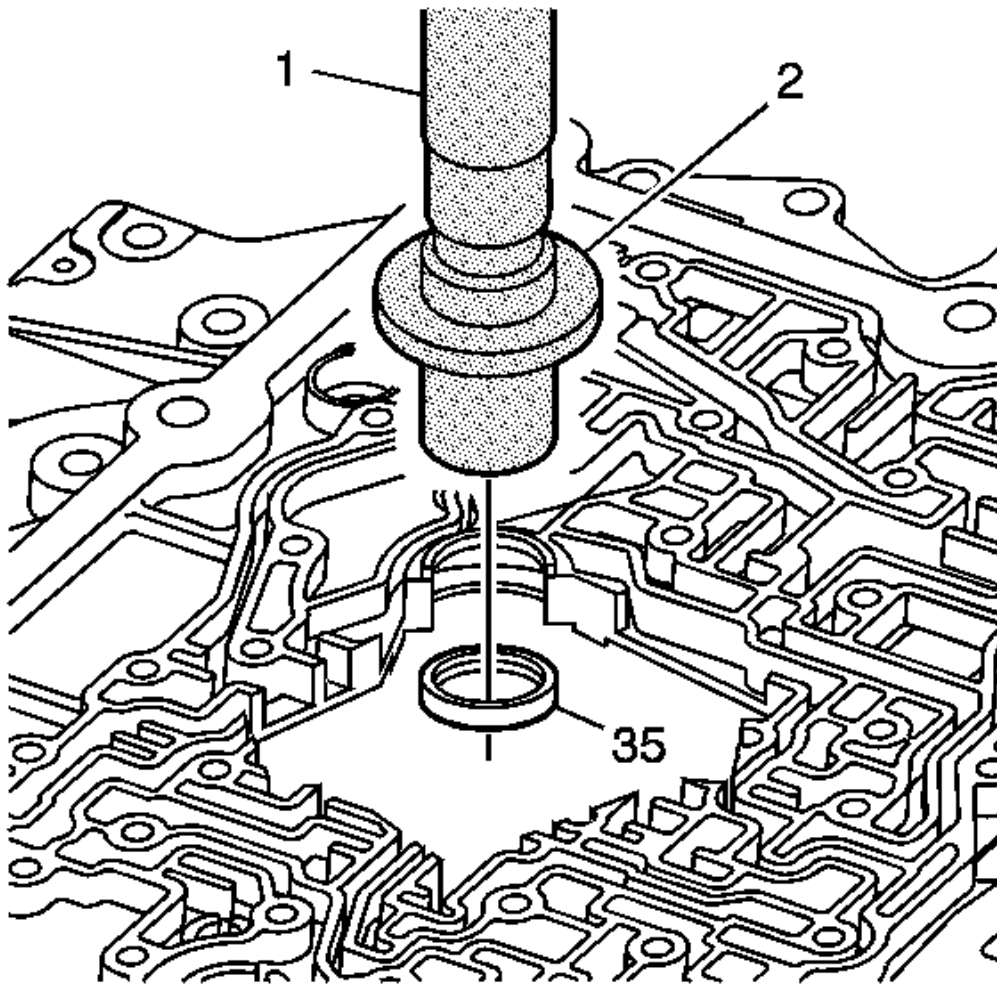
Identifying Case Cover To Turbine Shaft Seal, J 7079-2 & J 39062
